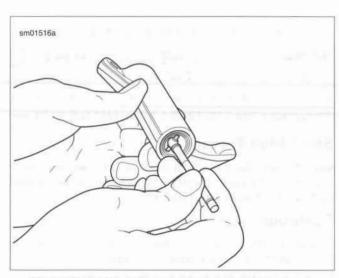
Measuring Rocker Arm Bushing Inner Diameter
